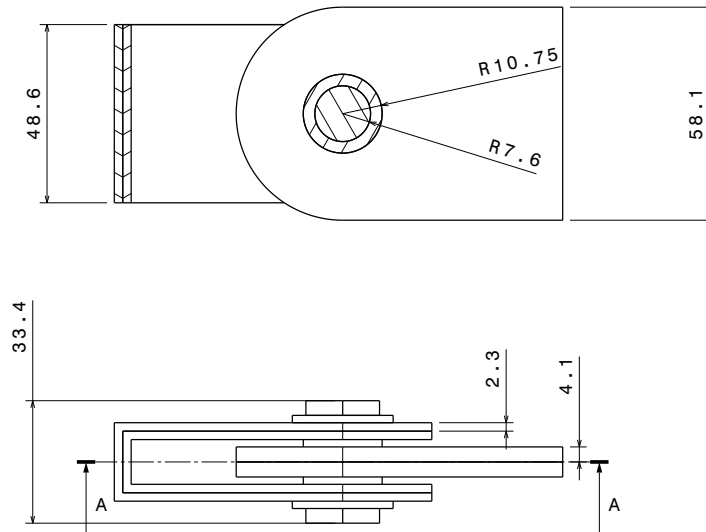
Lug fail-safe concept, dimensions in [mm]
